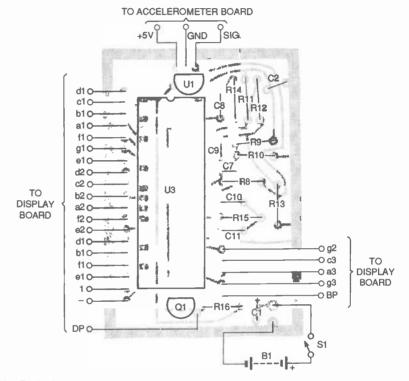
On-board component placement on this A/D-converter board is pretty simple. Just be careful when making the off-board connections to the display board. Also, note the placement of the 3-pin header.
